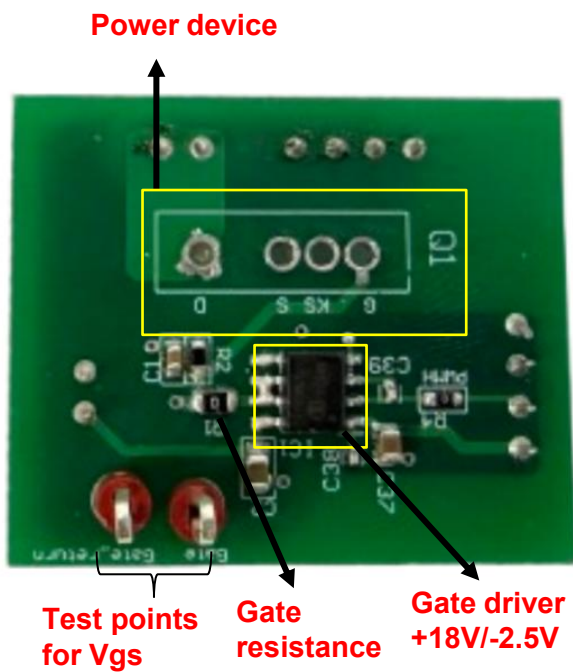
SCT evaluation board: Daughter card with TO-247-4L footprint and a gate driver.
